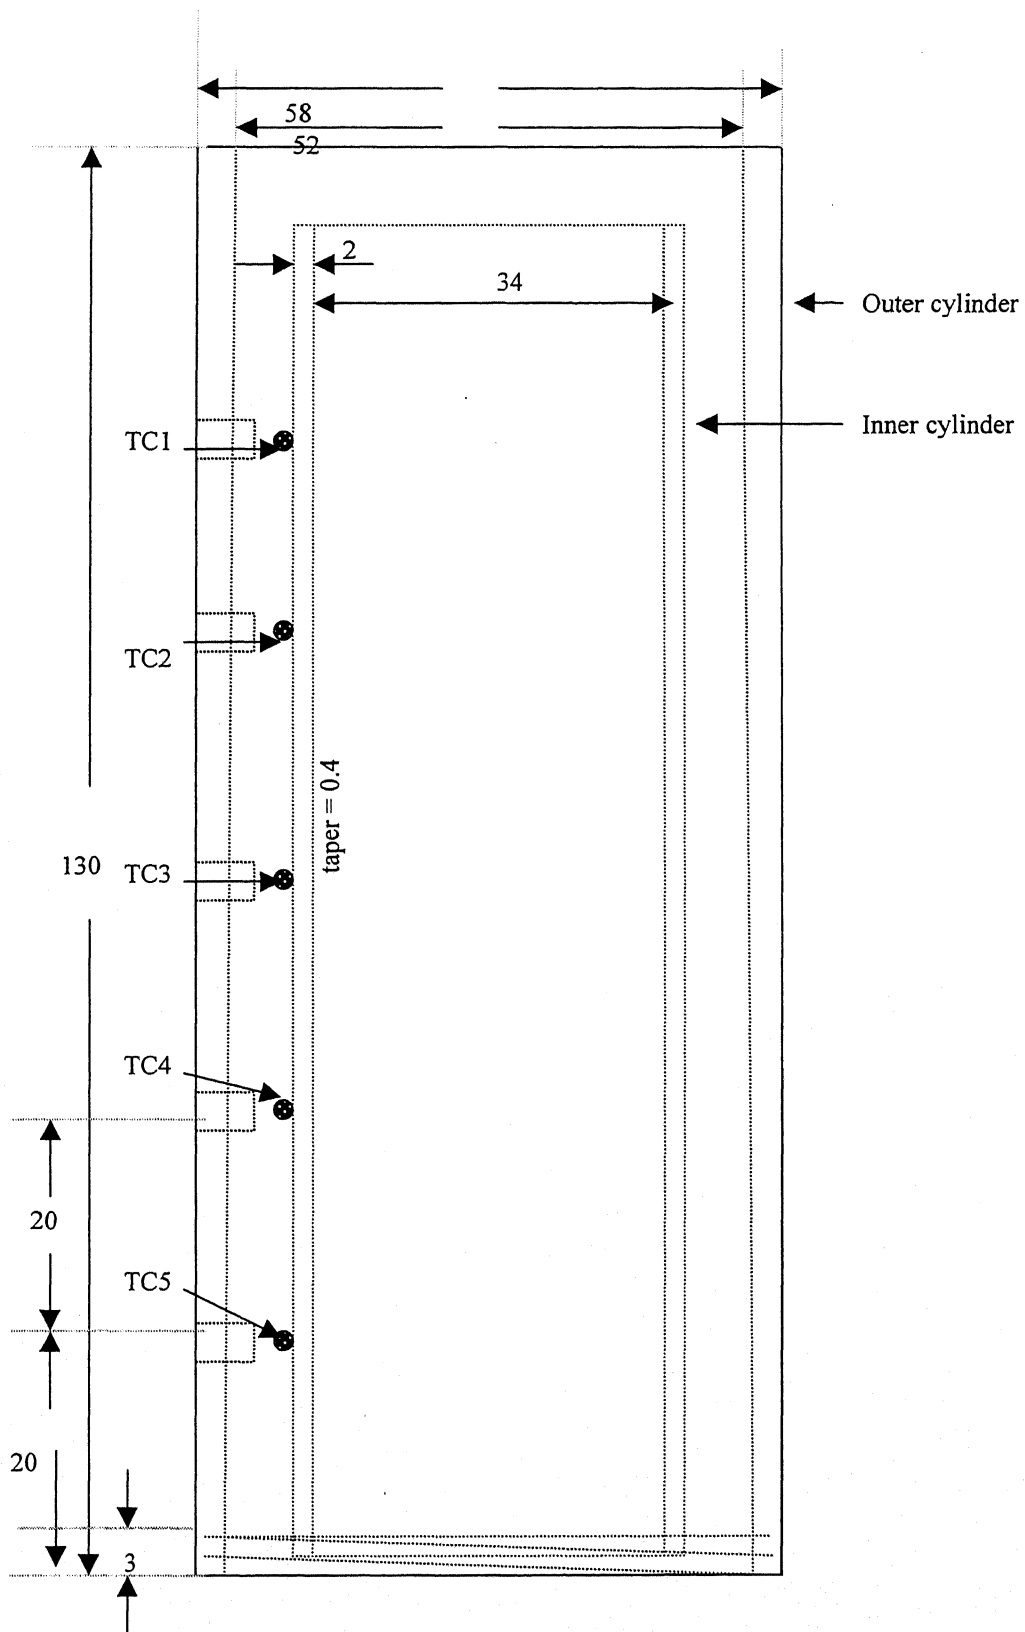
Design of instrumented mould; dimensions in millimeter.
